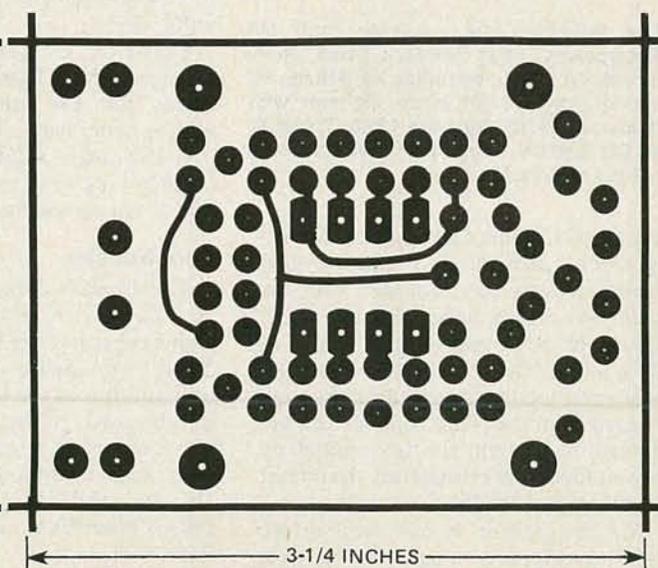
TOP SIDE OF BOARD contains several traces necessary for proper operation. Since board is not plated-through, those traces may be replaced by jumpers.
